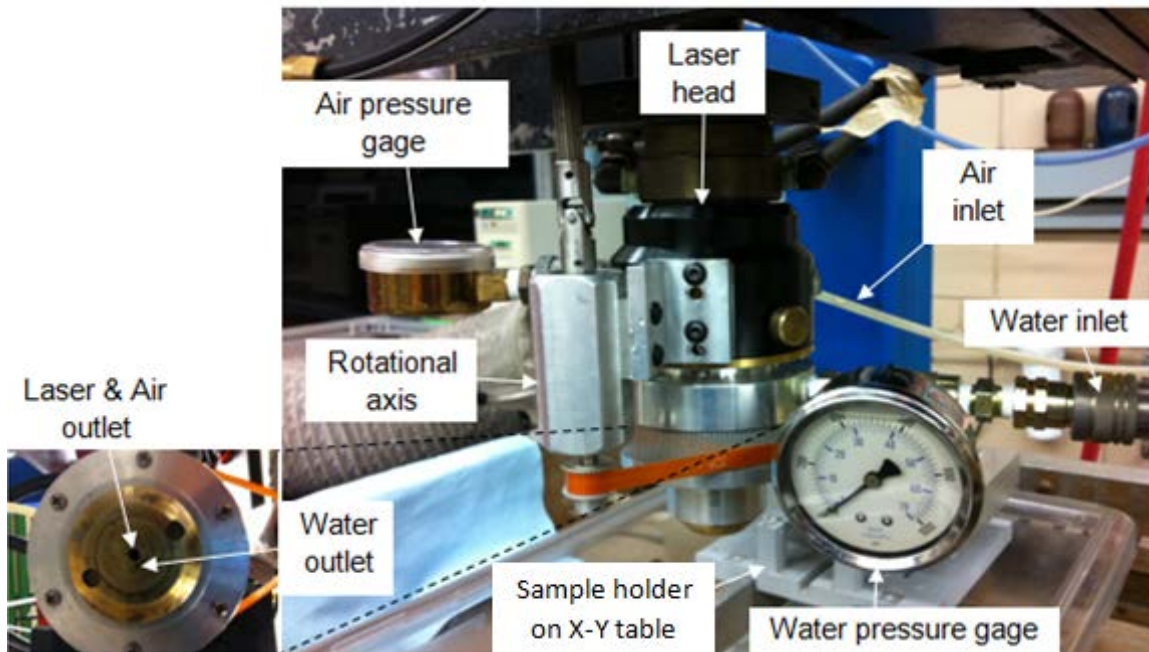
Experimental setup of CO₂-LWJ machining system
